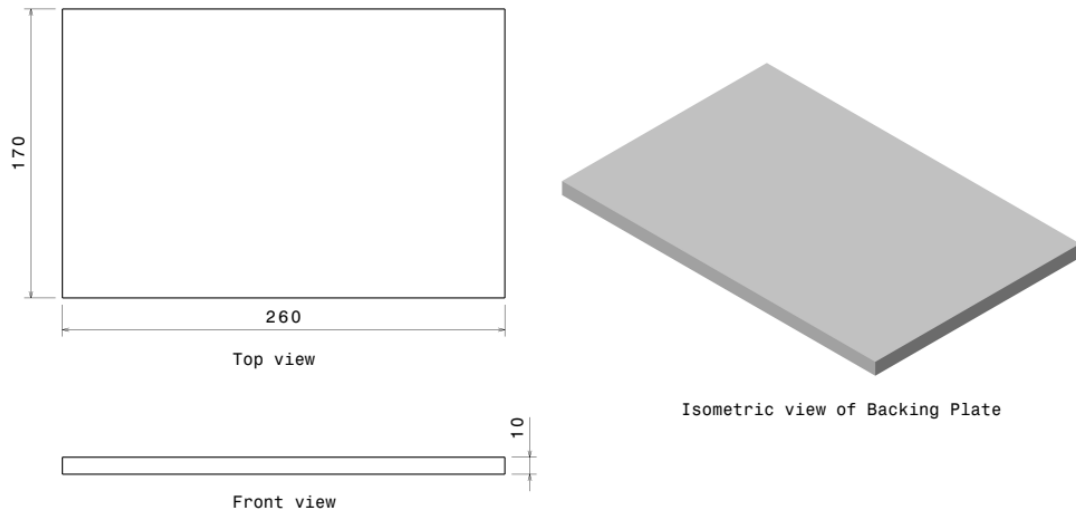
3: Dimensions & isometric view of bottom backing plate
